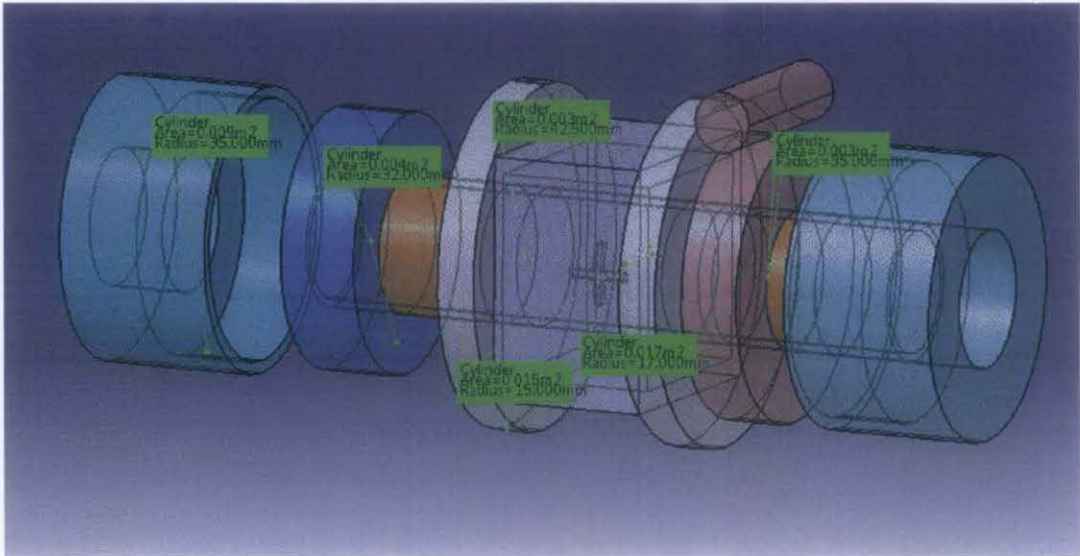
3D view of 2nd proposal pipe section
